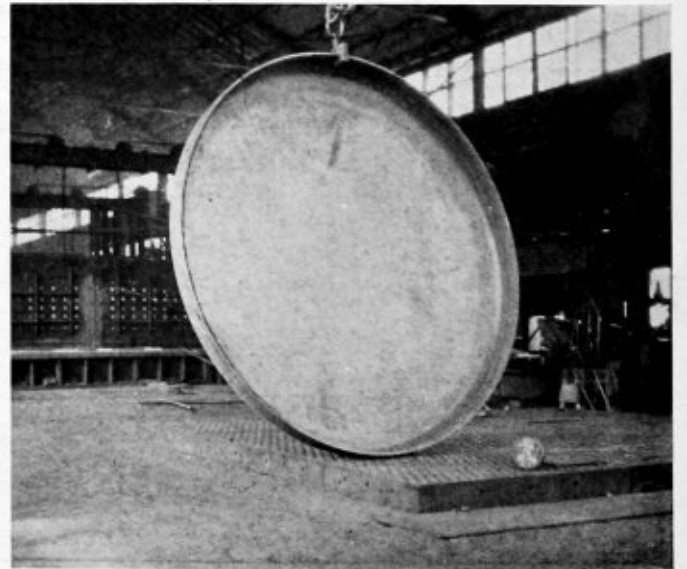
This Head Has a Straight 6 $\frac{1}{4}$ -Inch Flange, While the Radius of the Dish Is 120 Inches
